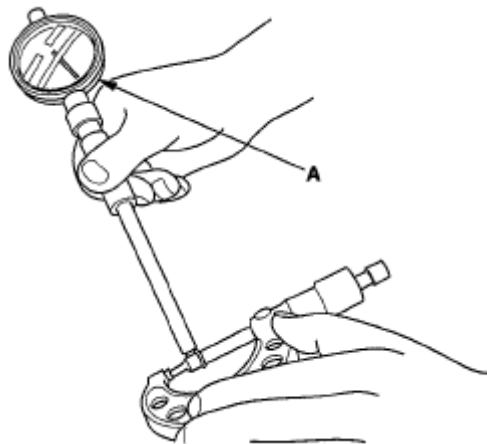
Identifying Zero Gauge To Shaft Diameter
